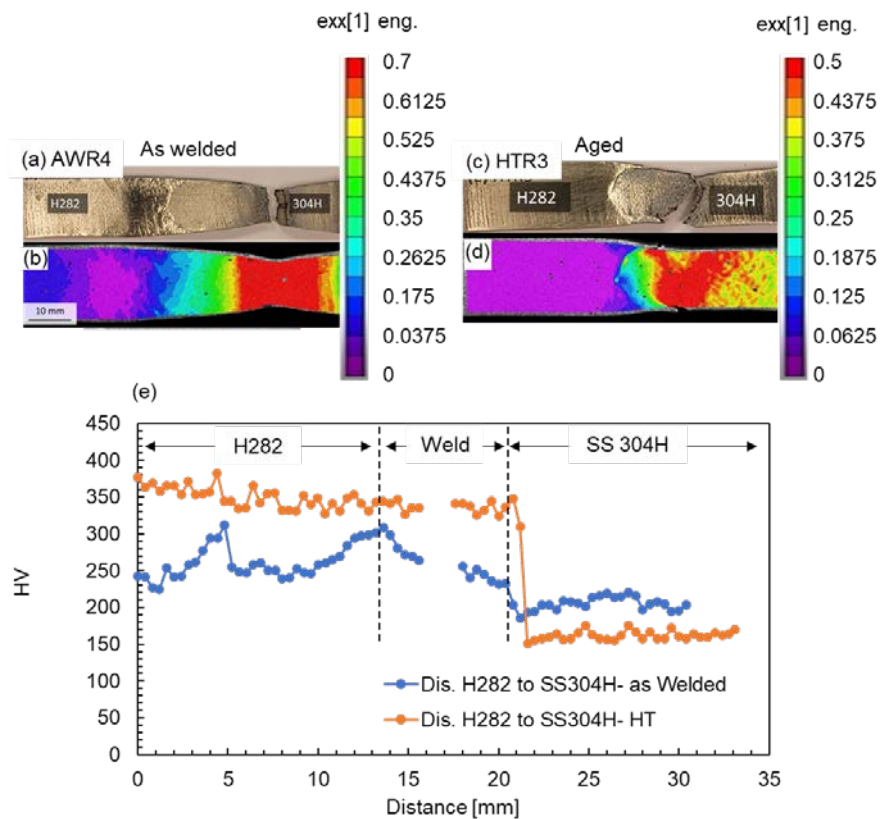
(a, c) Macrographs for H282/SS304H dissimilar weld samples in the as welded and aged (labeled HT) conditions, respectively, (b, d) DIC maps for engineering strain just before fracture in RT tensile testing, (e) hardness line profile for the as welded and fully aged (HT) samples
